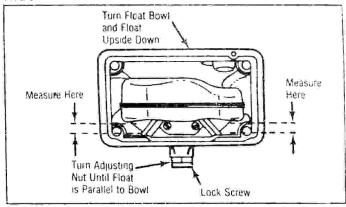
Float Level Adjustment - Dry Setting (Type C - If Equipped)
